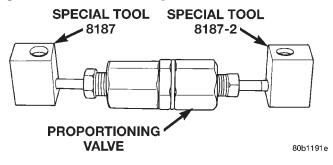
Pressure Test Fitting Installed In Proportioning Valve
